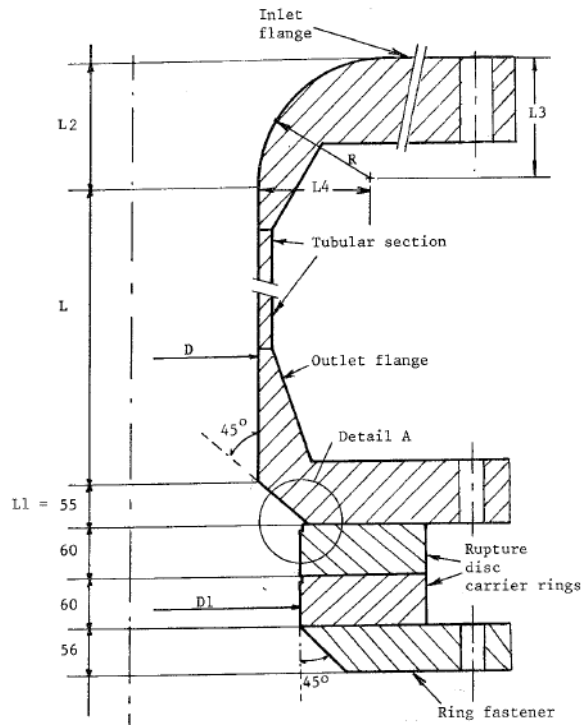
Dimensions of the test nozzle used for tests 1-12 [12]
